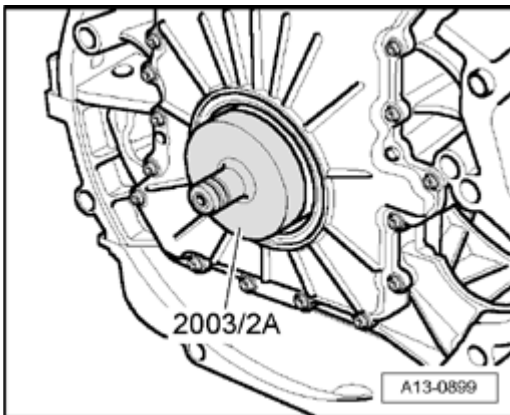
Pushing New Seal Onto Crankshaft Using Press Sleeve 2003/2 A
